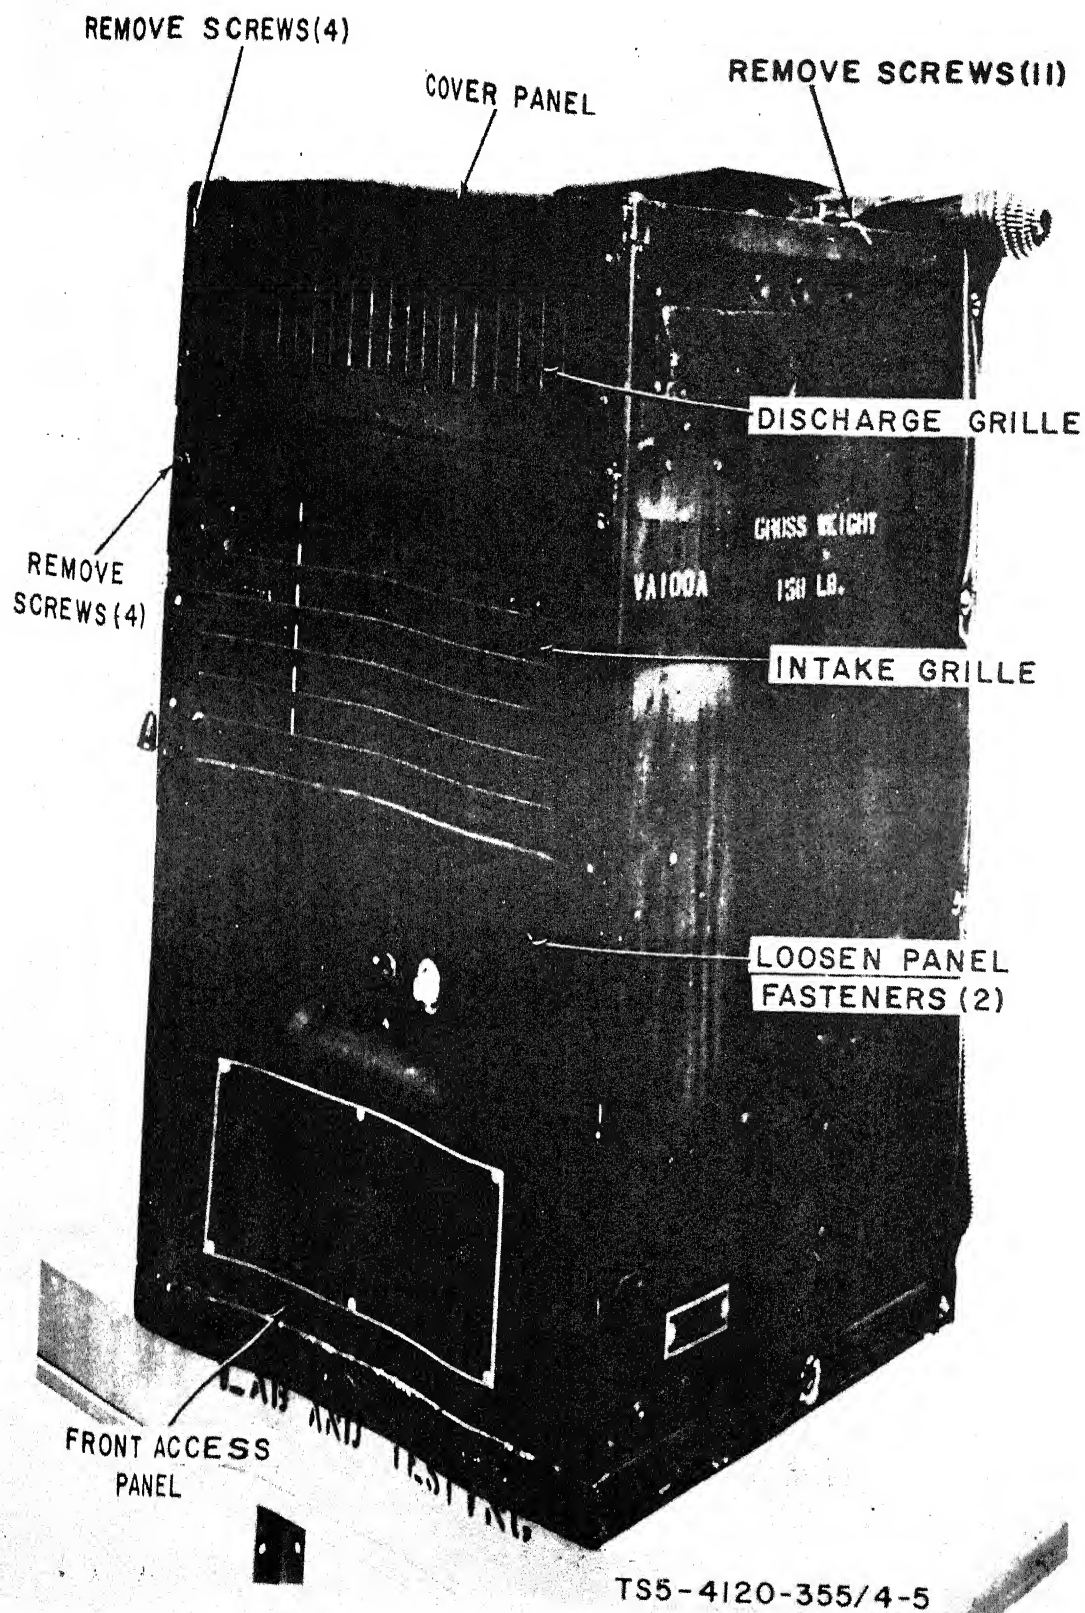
Discharge Grille, Intake Grille, Front Access Panel, Removal and Installation.
